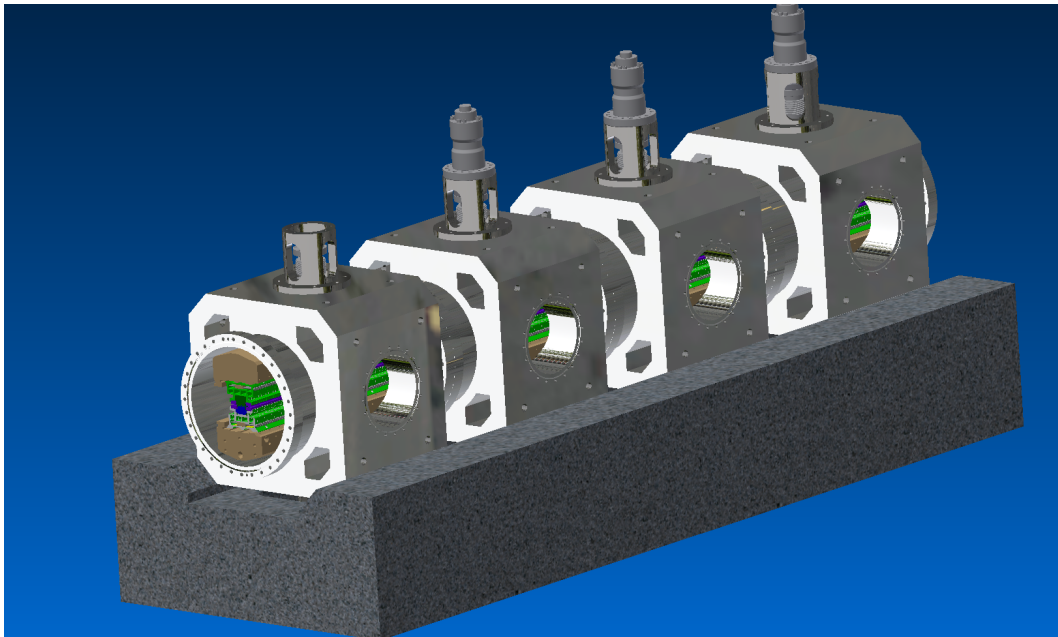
Design study for a new compact and modular in-vacuum undulator. The machined modules combine vacuum chamber and support structure. The load will be distributed over several drive units.
